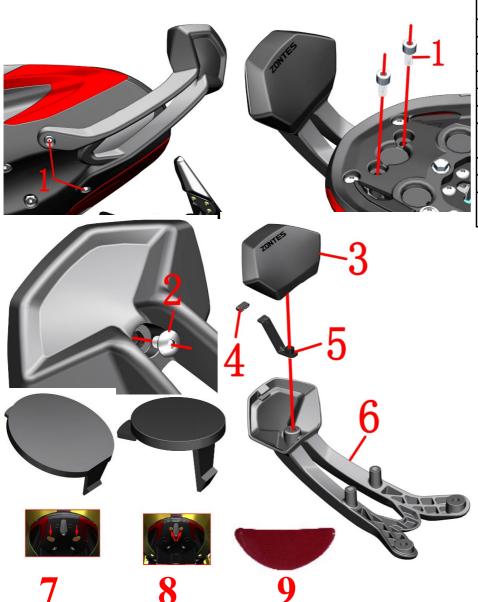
REAR COVER		Backrest assembly componen	CHK	401
